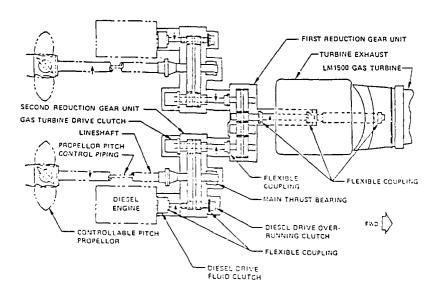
Reduction Gearing, Clutches, Shafts & Propellers
